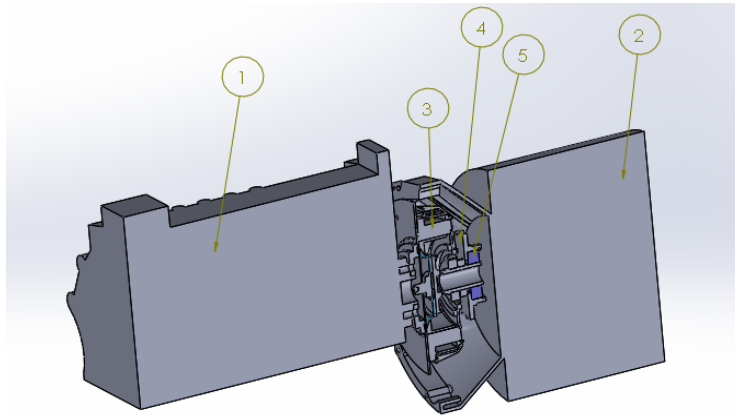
Concept design (1. Combustion engine, 2. Electric motor , 3. Electromagnetic powder clutch , 4. Sprocket 5. One way bearing)
